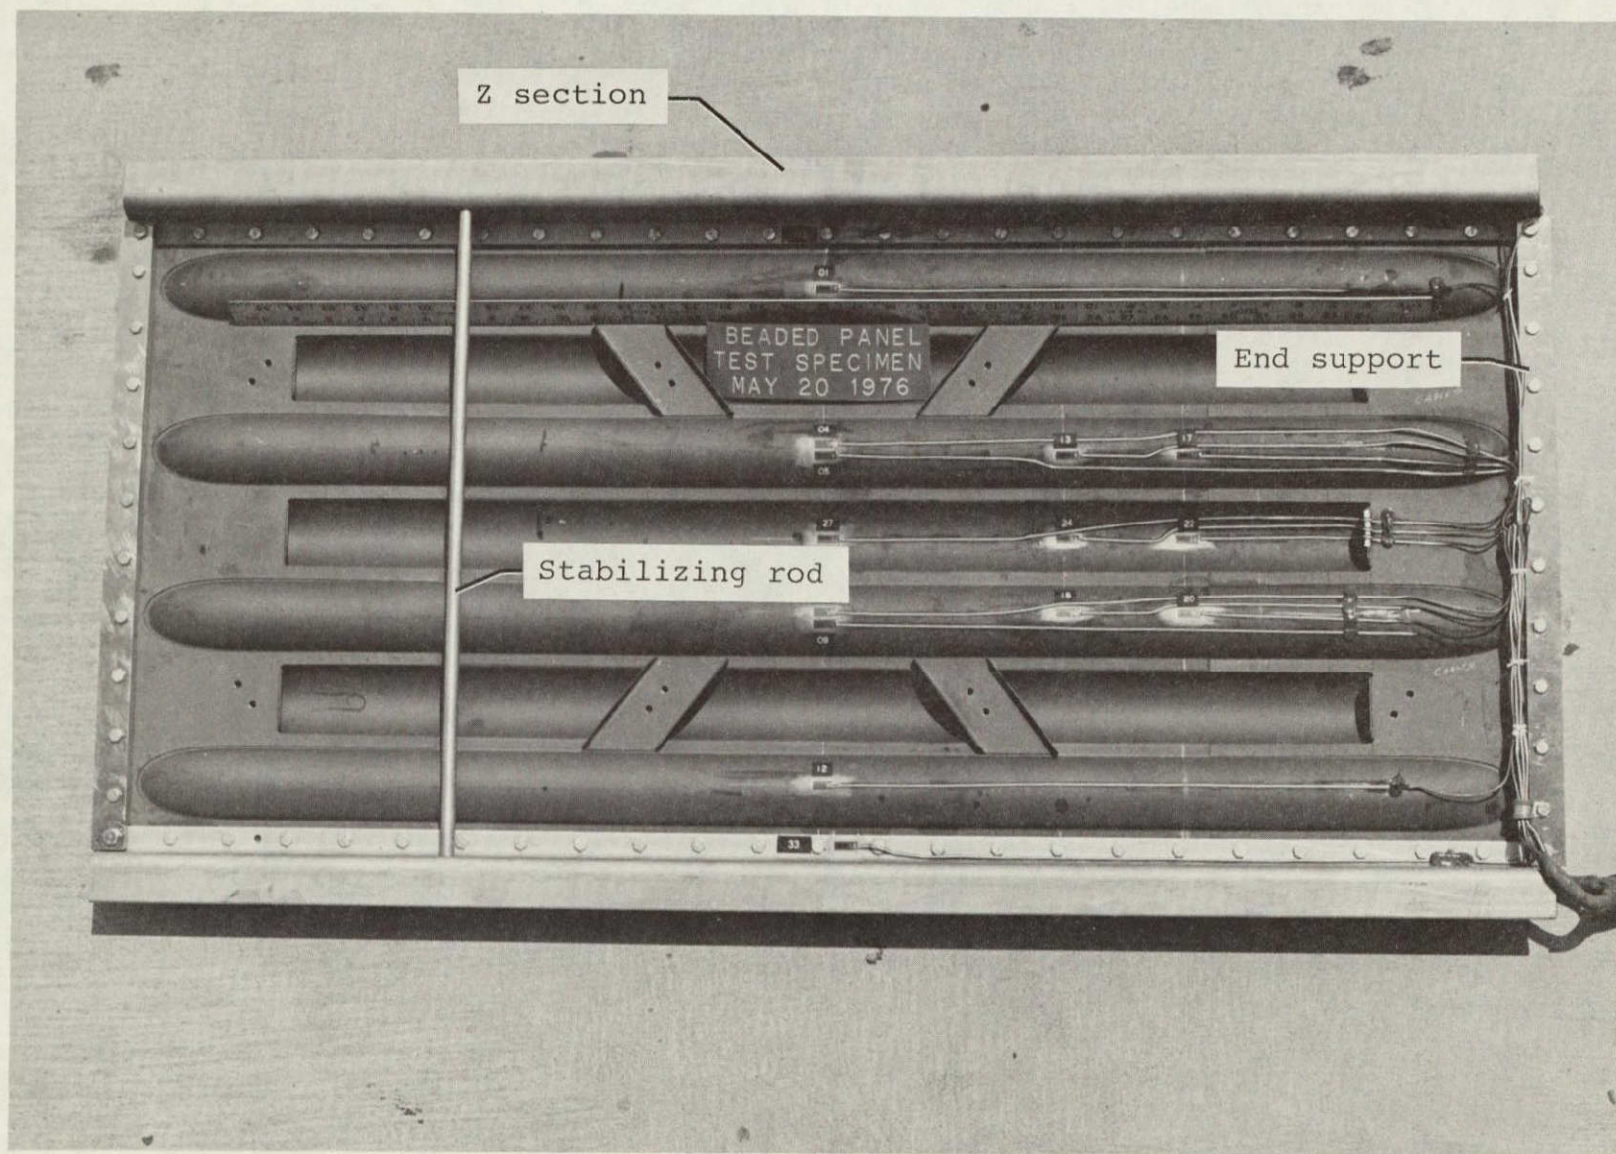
Side stiffeners, end supports and stabilizing rod mounted to the beaded panel.
